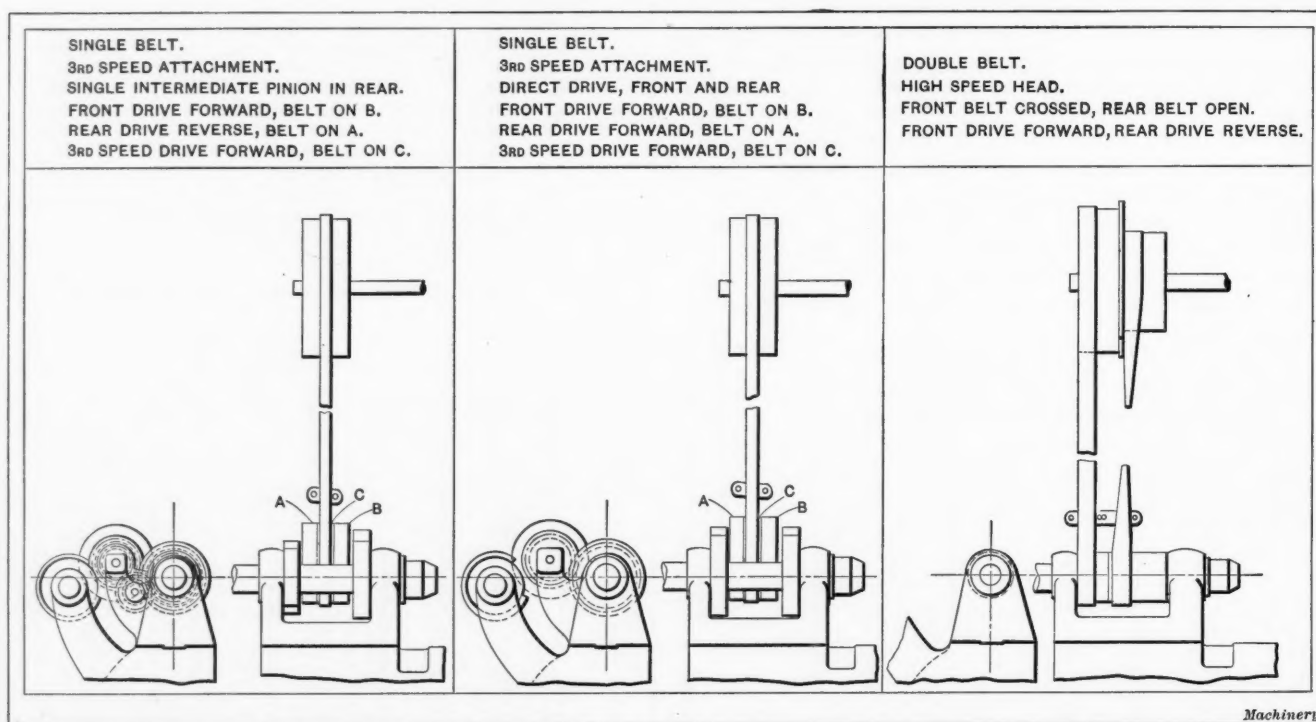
Third-speed Type of Spindle Drive for Heavy cutting, and High-speed Spindle Drive particularly adapted for Brass Work
